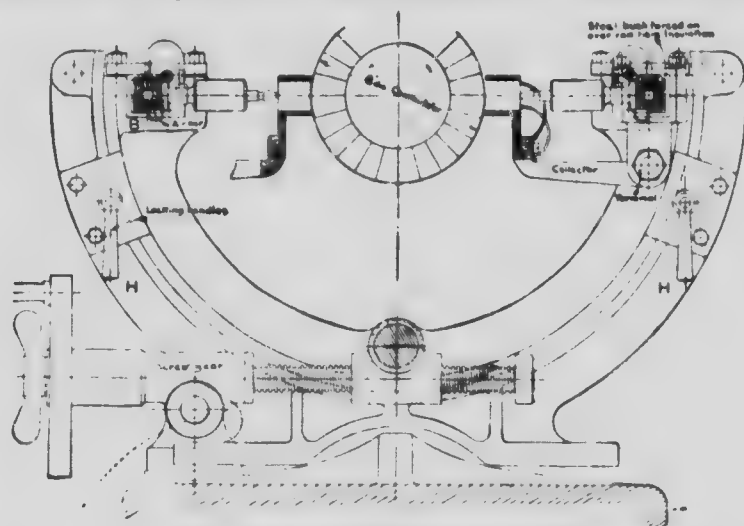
Detail of Rigging for Pneumatic Brushes.
